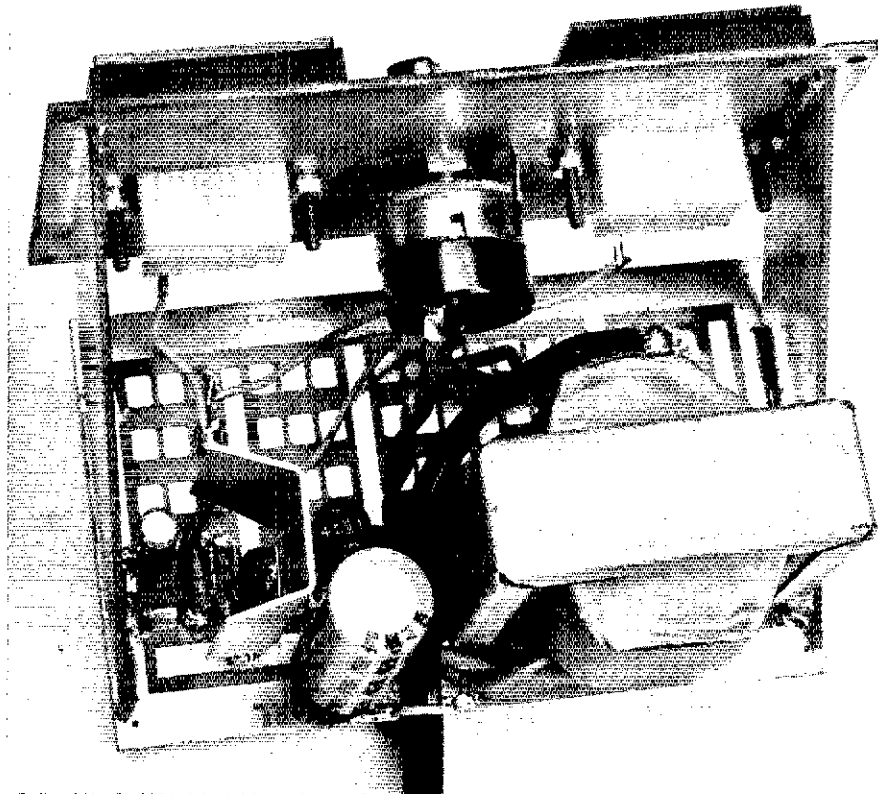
Rear view of the assembled power supply. The ac line cord is held secure by means of a tight loop of wire which is soldered to the pc board. The metal object in the left foreground is the heat sink for U1. The layout is slightly different from the recommended one in Fig. 9.
